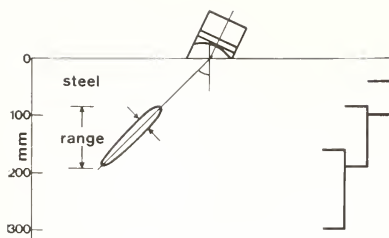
Weld testing with direct-contact focusing transducers.
